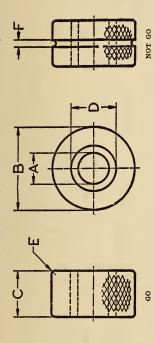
American Gage Design Standard plain ring gages, details of construction
